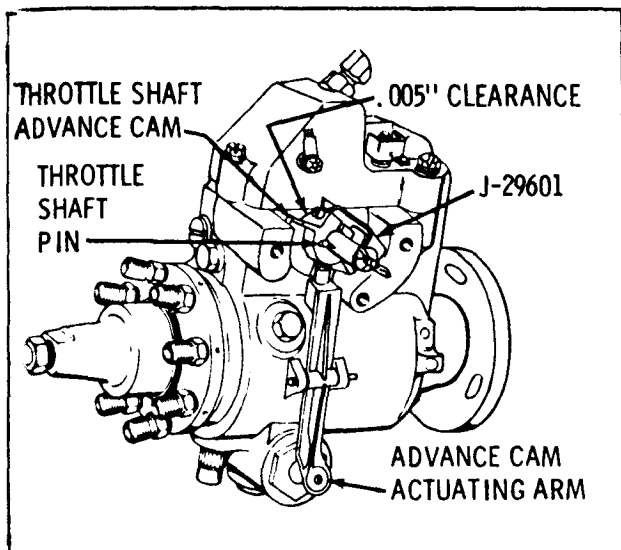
C5-28 Injection Pump Tool J-29601 Installed
